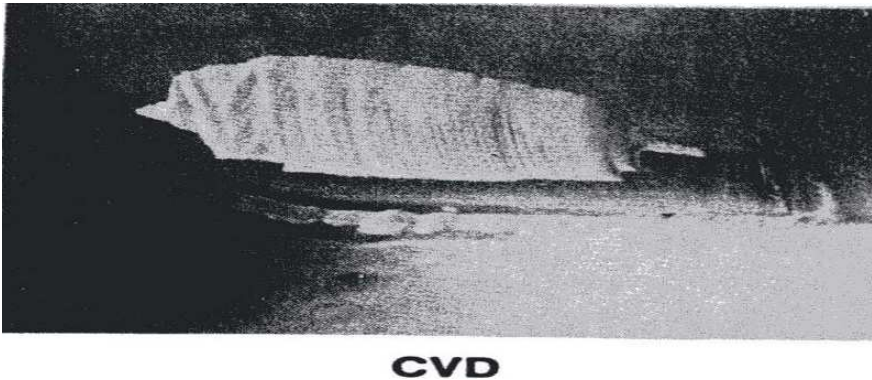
Appearance of an TiN CVD Coated Insert at the end of Tool Life After Machining 1045 AISI Steel [58]
